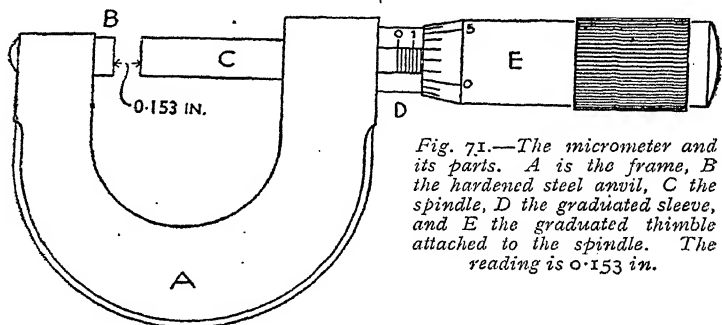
The micrometer and its parts. A is the frame, B the hardened steel anvil, C the spindle, D the graduated sleeve, and E the graduated thimble attached to the spindle. The reading is 0.153 in.
